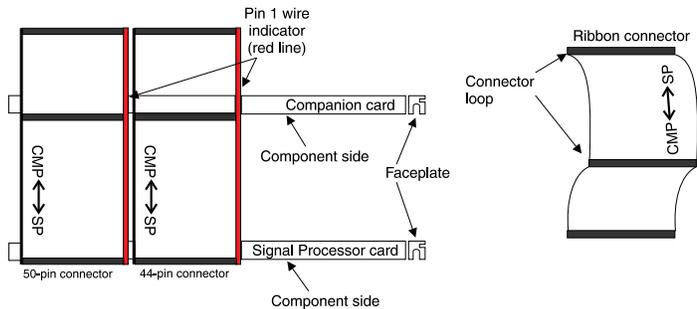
Top View of the Signal Processor/Companion Bus Cables
